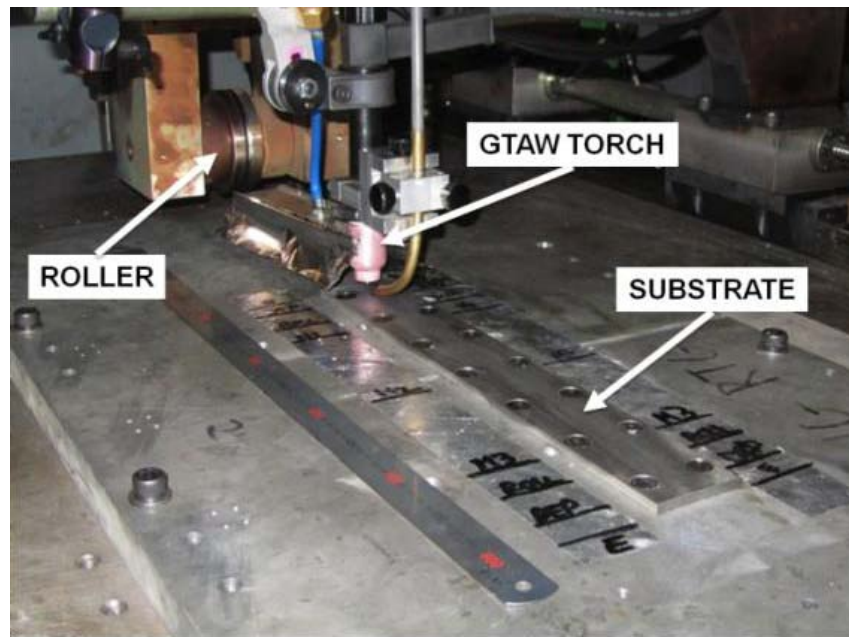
Rolling equipment at the Welding Engineering Research Centre, Cranfield University [17]
